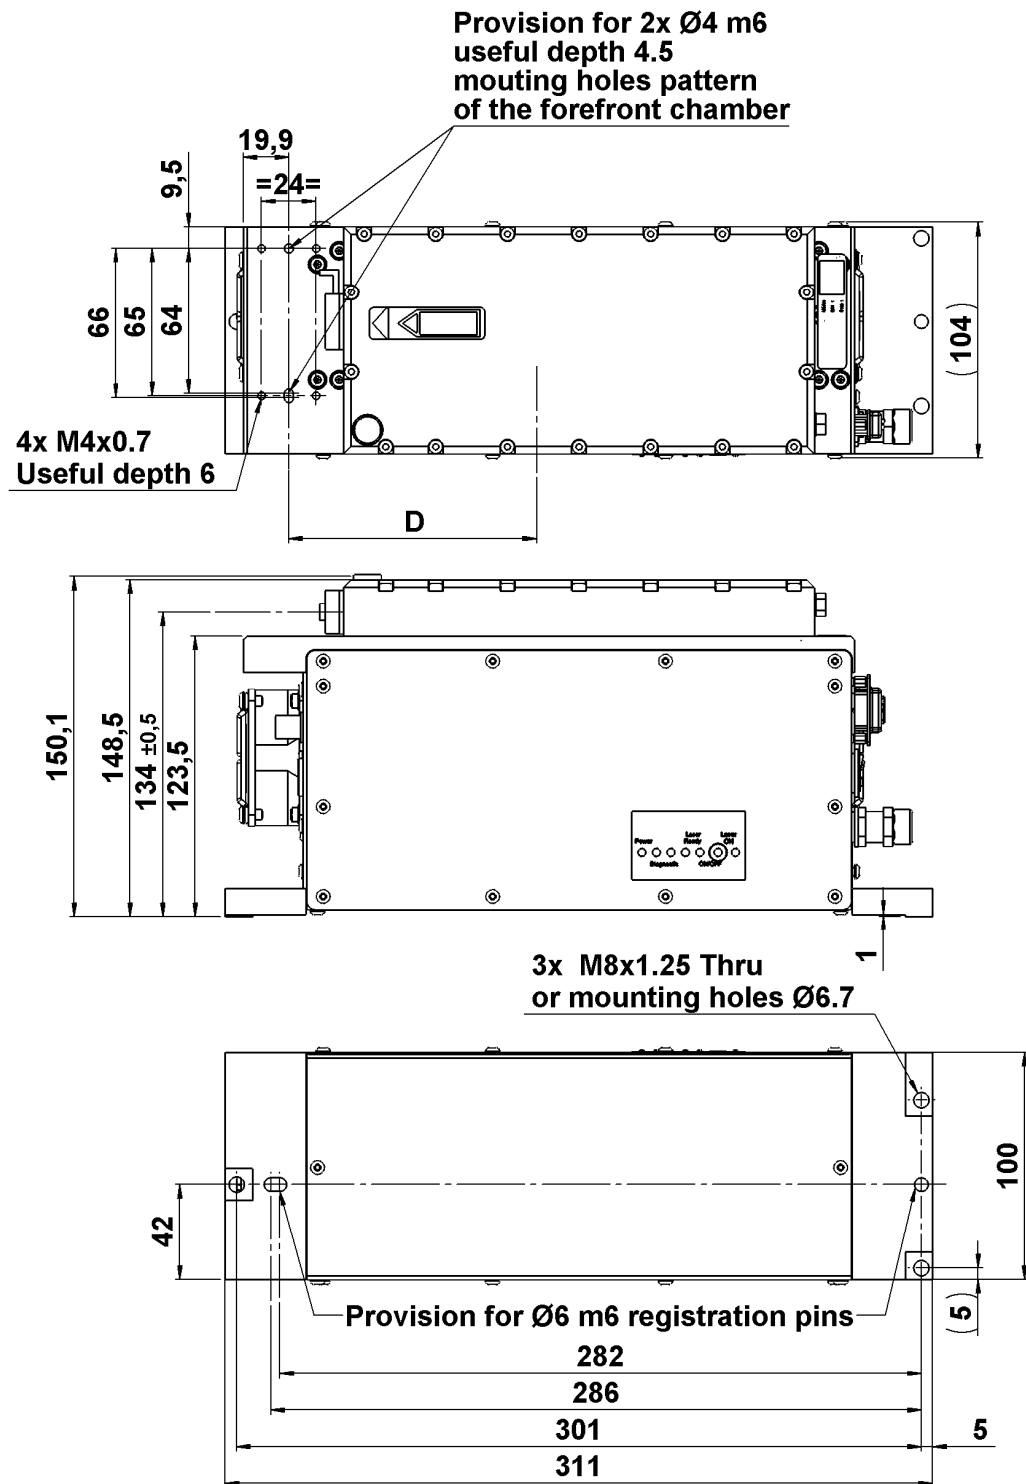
OEM Laser system drawing (Bottom, Side, Top view)
